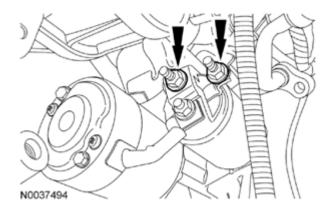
Locating Starter Motor Harness Wire Nuts Courtesy of FORD MOTOR CO.
